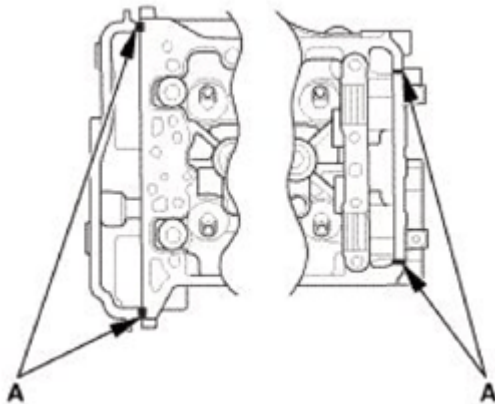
Identifying Liquid Gasket Applying Area On Chain Case And No. 5 Rocker Shaft Holder Mating Surface
